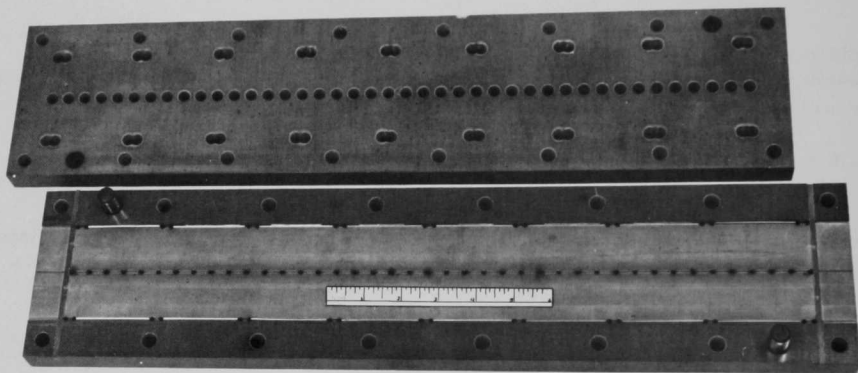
Initial Fixture for Spot Welding Spacer Wires to Dummy Fuel Plates
